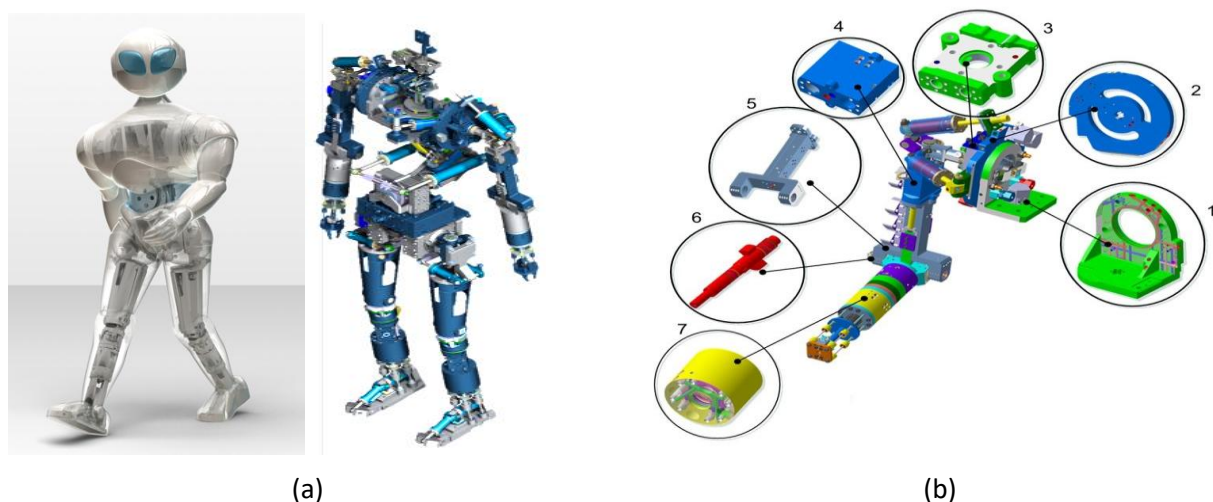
a) HYDROiD robot CAD 3D model b) Overview on the arm hydraulic integrated parts masses: 1- Shoulder upper part, 2- Shoulder middle part, 3- Shoulder lower part, 4- Elbow upper part, 5- Elbow lower part, 6- Elbow axis of rotation, 7- Wrist part
